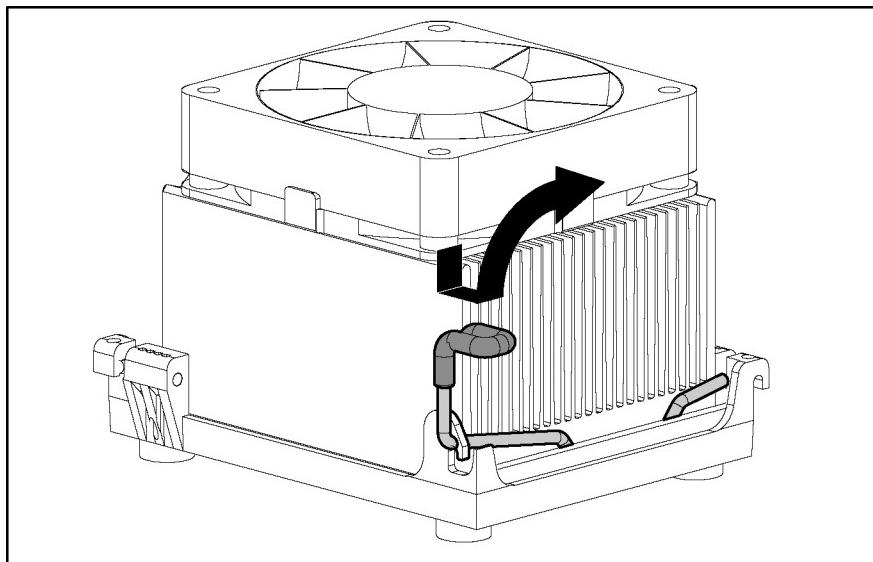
Removing the levers from the heatsink/CPU fan assembly
